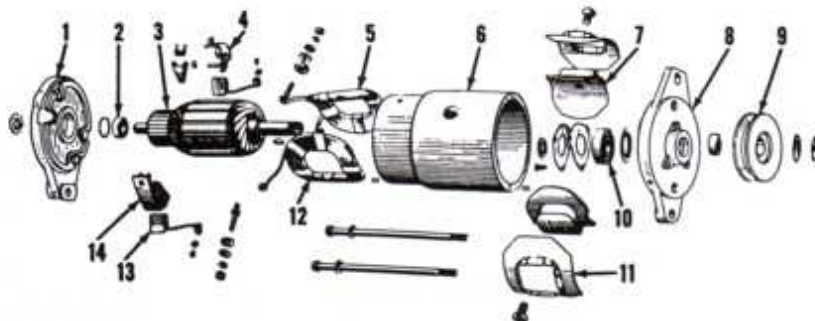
Exploded view of typical Delco-Remy starter-generator.
